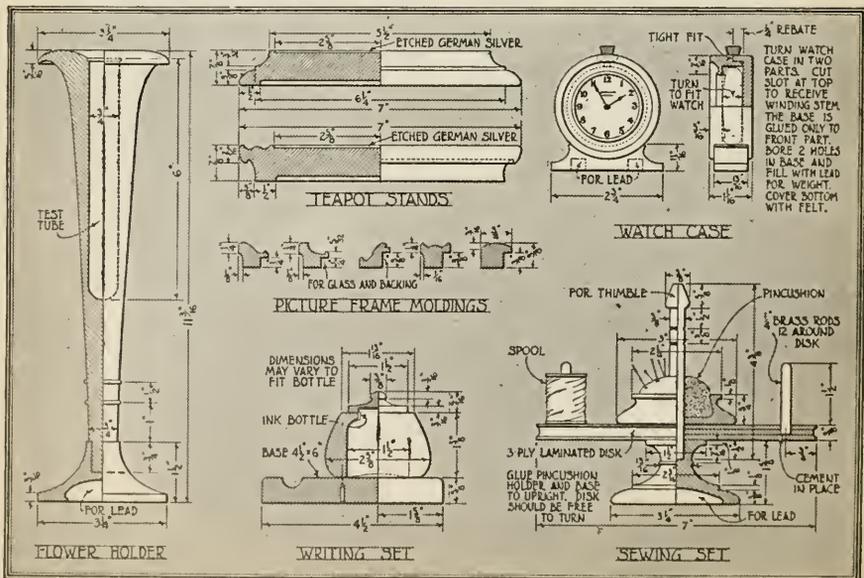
Flower holder, teapot stands, picture frame moldings, writing and sewing sets, and watch case. The dimensions indicated have proved satisfactory, but they can be modified by the individual worker.
